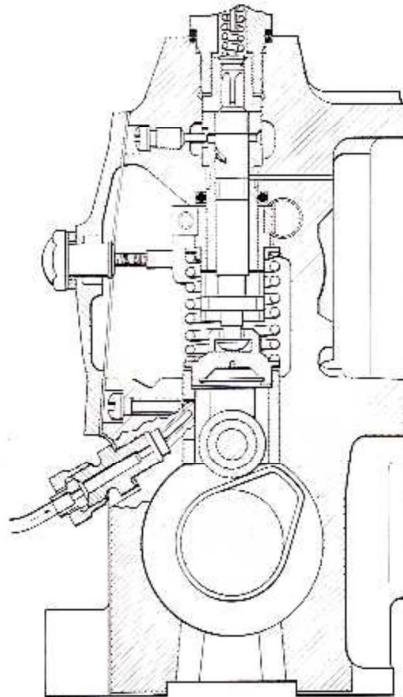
SECTION VIEW OF STAGE III TYPE PUMP
